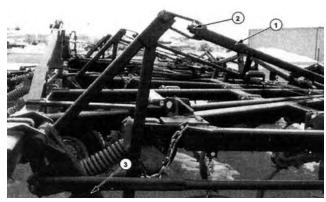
Adjustor Link Assembly. (1) Wheel Standard Link, (2) Adjusting Bolt and (3) Wheel Standard.
